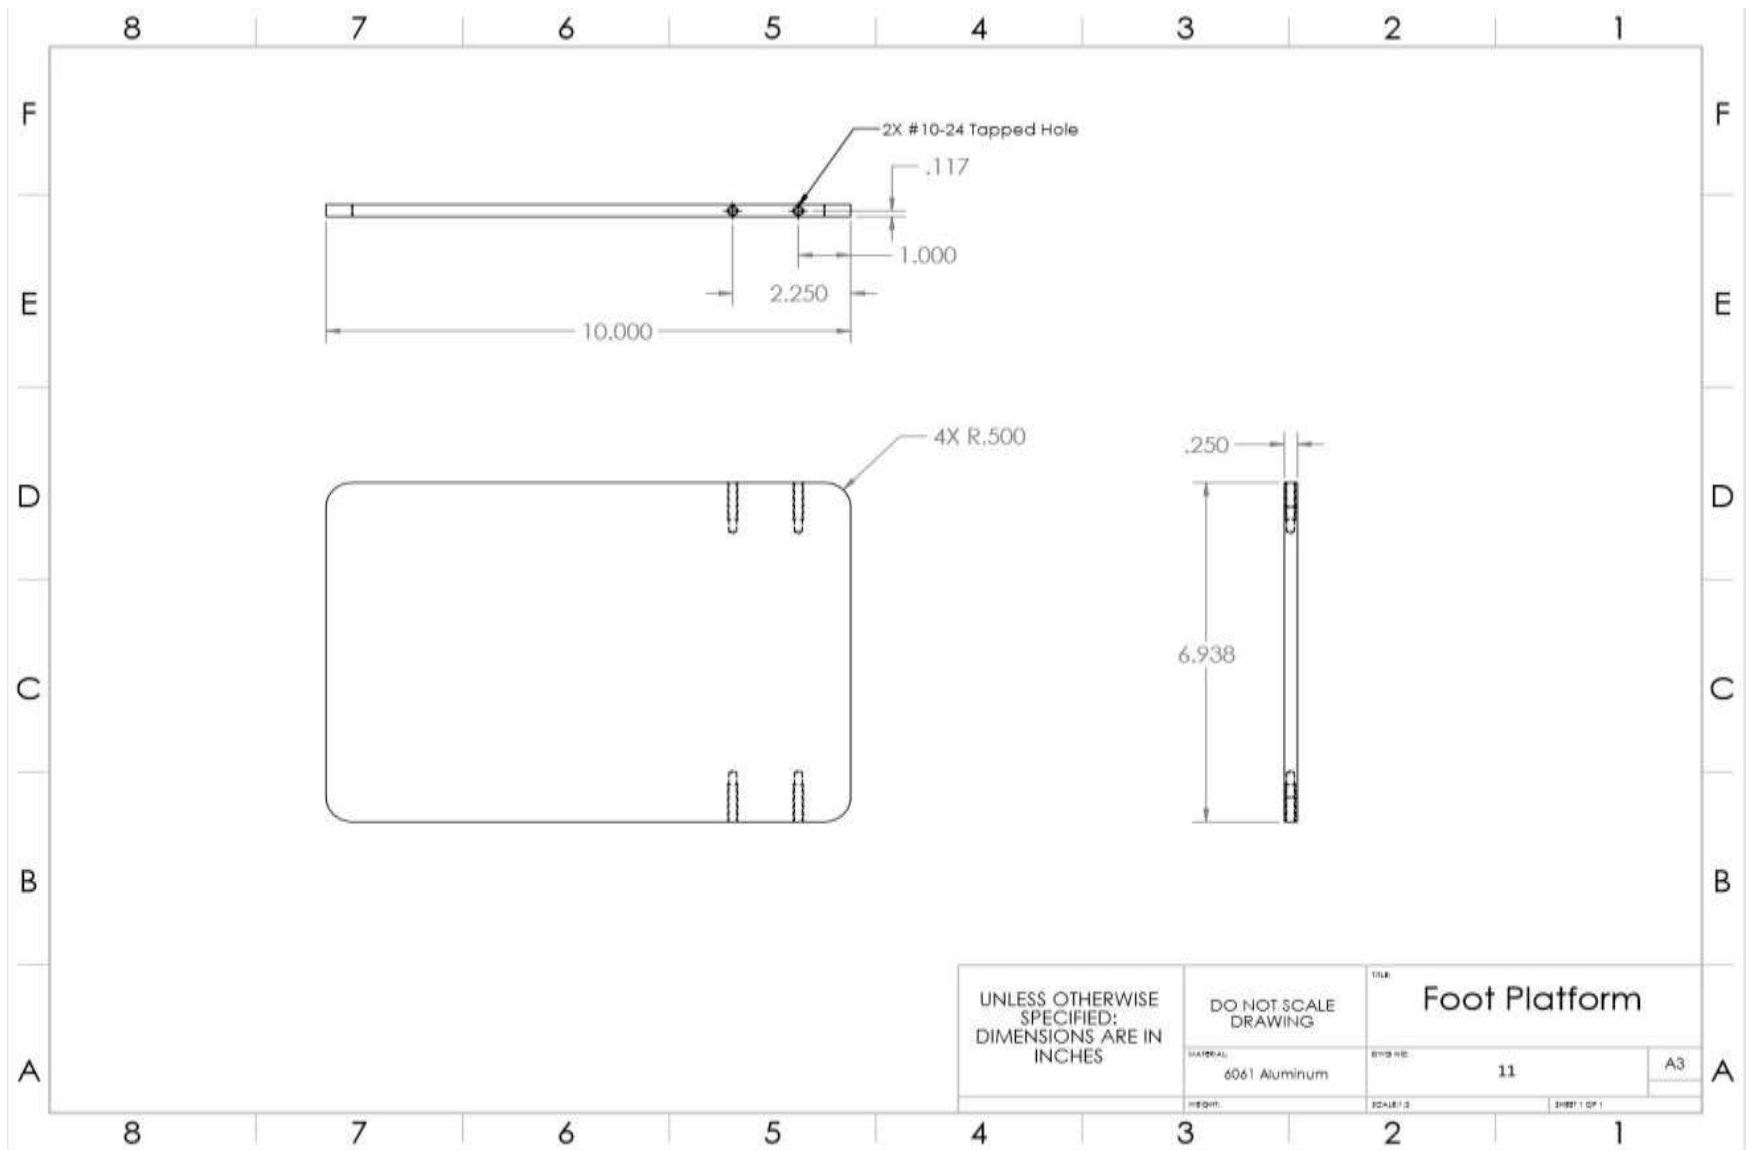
11. Mechanical Drawing of Foot Platform.
